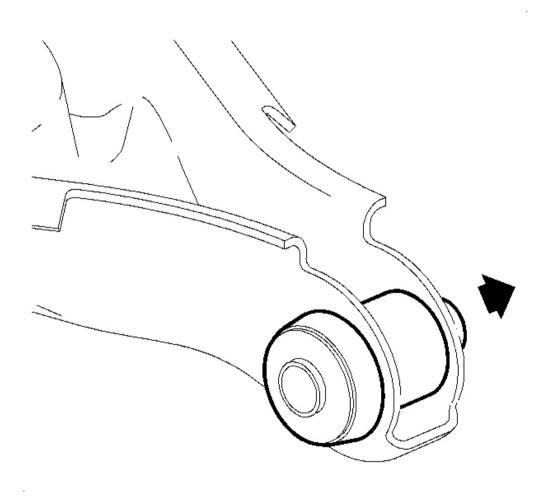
Bushing & J 45097 Courtesy of GENERAL MOTORS CORP.
